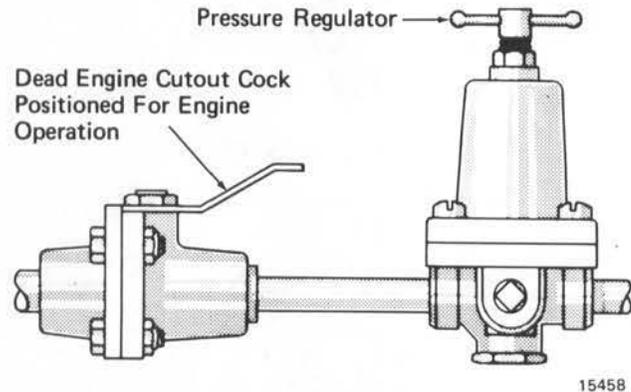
Dead Engine Cutout Cock And Pressure Regulator
